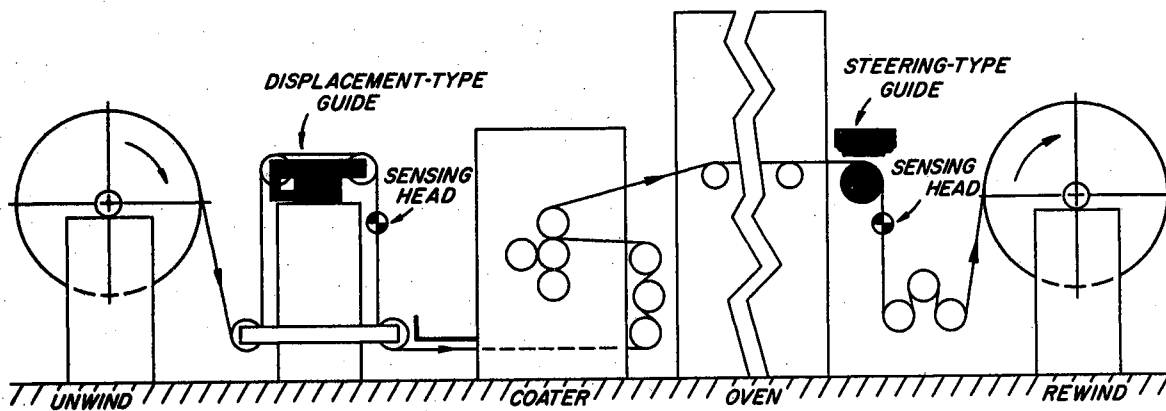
Web Coating Line With Steering and Displacement Guides.
